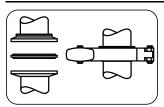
The length of pressure transmitter thread should be longer than the depth of the thread to ensure the seal of head face gasket is effective. Picture 2: The length of pressure transmitter thread should be shorter than the depth of the thread to ensure the seal of root gasket is effective
